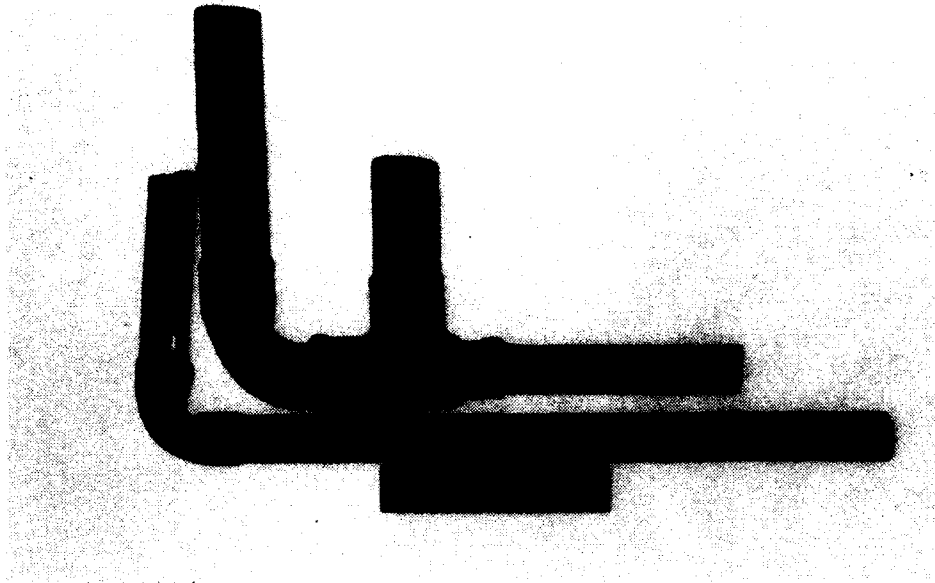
External Surfaces of Specimens 4 and 5 Removed Before Hot Water Flushing.
